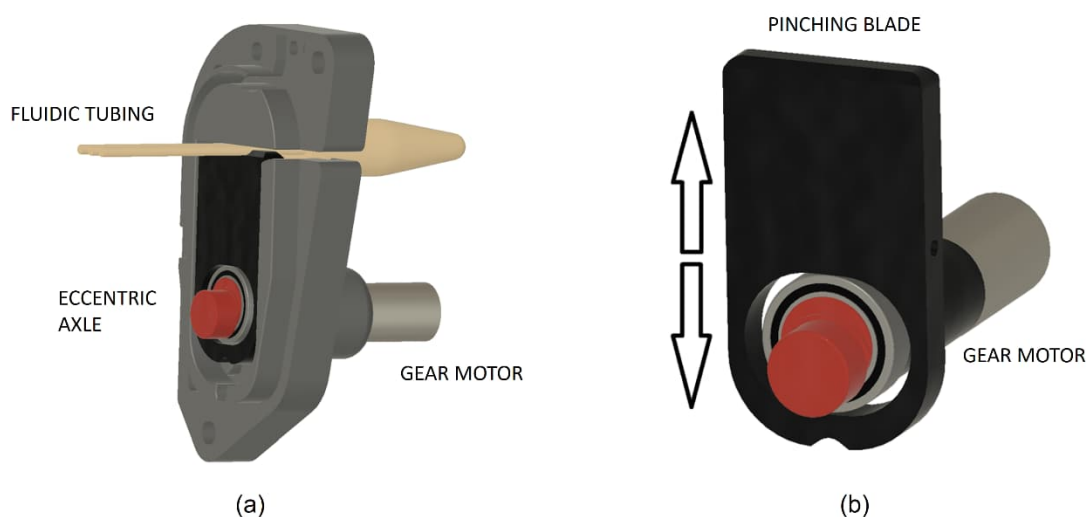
Pinching mechanism for the miniature thermocycler. (a) 3D model of the unit. A geared motor is rotating an eccentric axle which pushes a pinching blade against the fluidic tubing to (temporarily) cut off connectivity. (b) Close-up view of the pinching blade with the geared motor and the eccentric axle.
